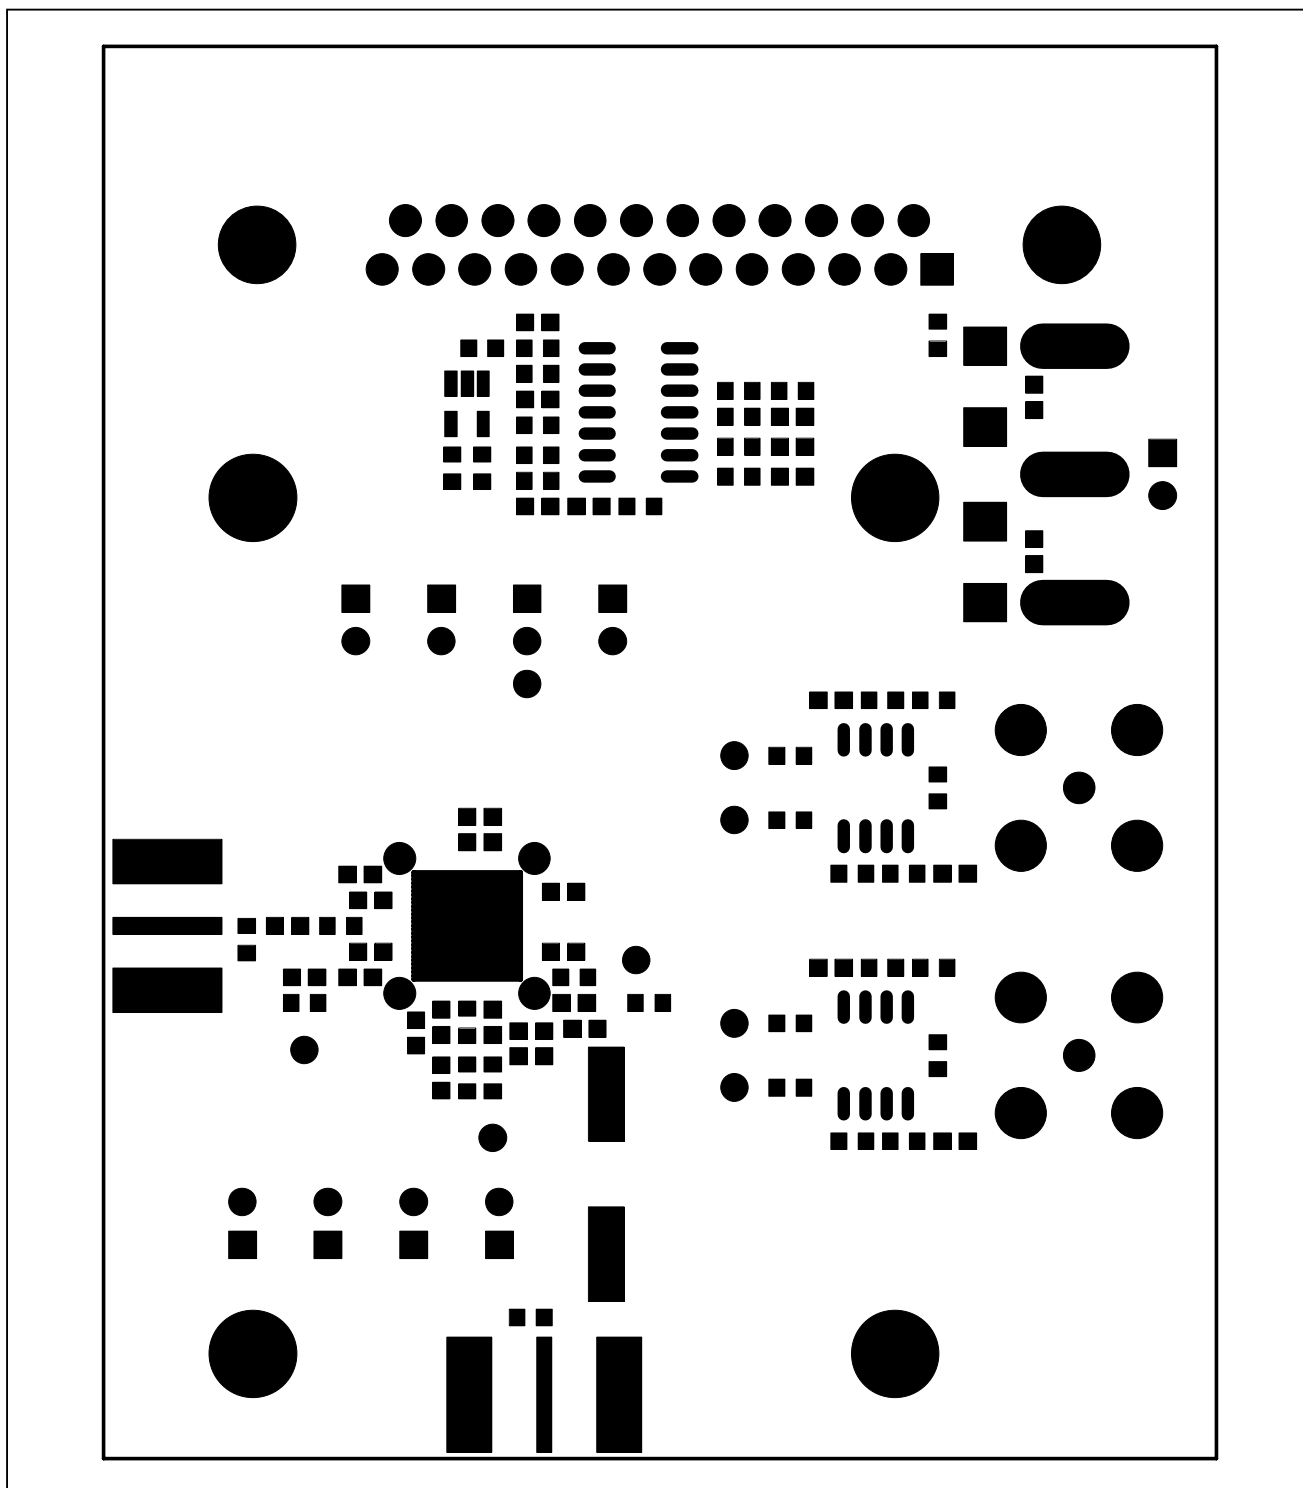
MAX2117 EV Kit PCB Layout—Top Soldermask
